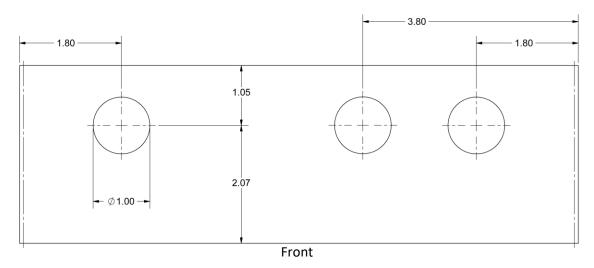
Surface Mount KLA Sleeve Drill Points (Top View)
